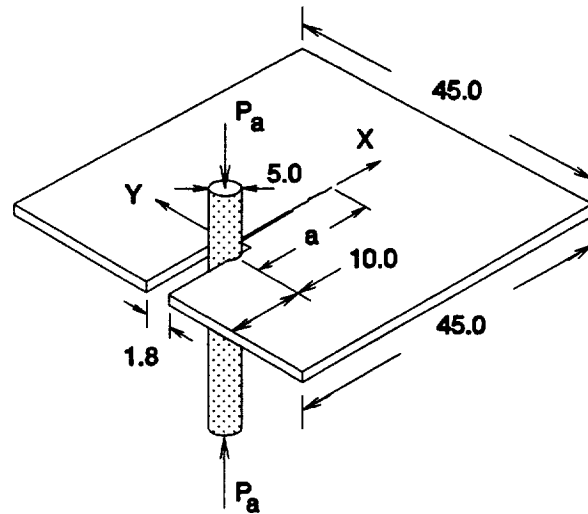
Modified Stable Poisson Loaded (SPL) specimen and loading configuration.
